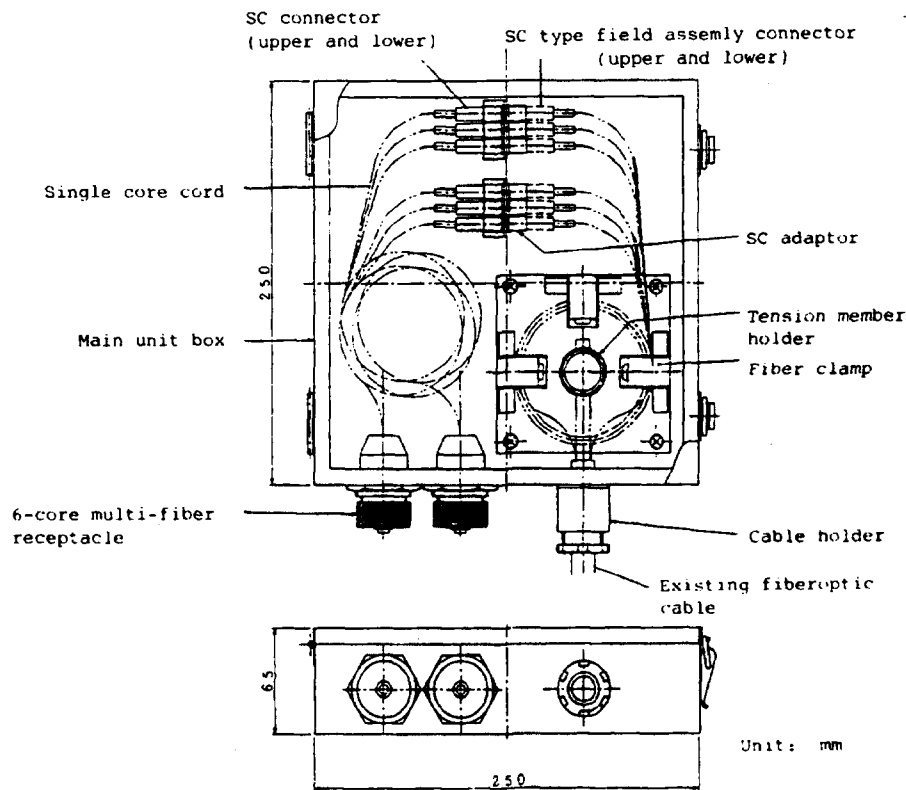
Joint box with existing fiberoptic cable (for 12-fiber connection)
